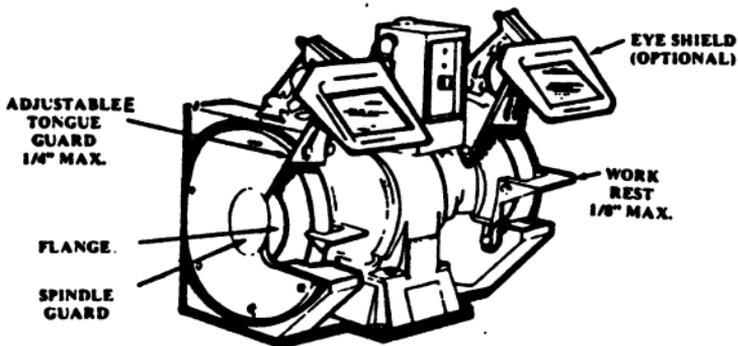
Grinder safety guards. (NIOSH Health and Safety Guide for Manufacturers of Lighting Fixtures.)
